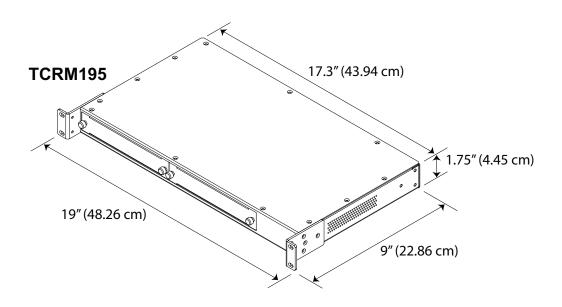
Rack Mount Chassis (TCRM195) Dimensions
